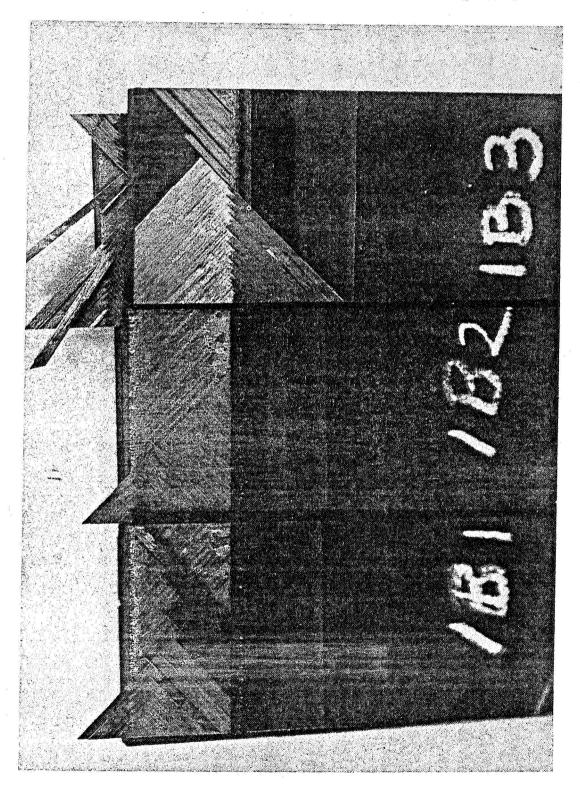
Lap Shear Specimen Failures on MEK Wiped Peel Ply Surfaces with MIL-C-27725 Fuel Tank Coating.
